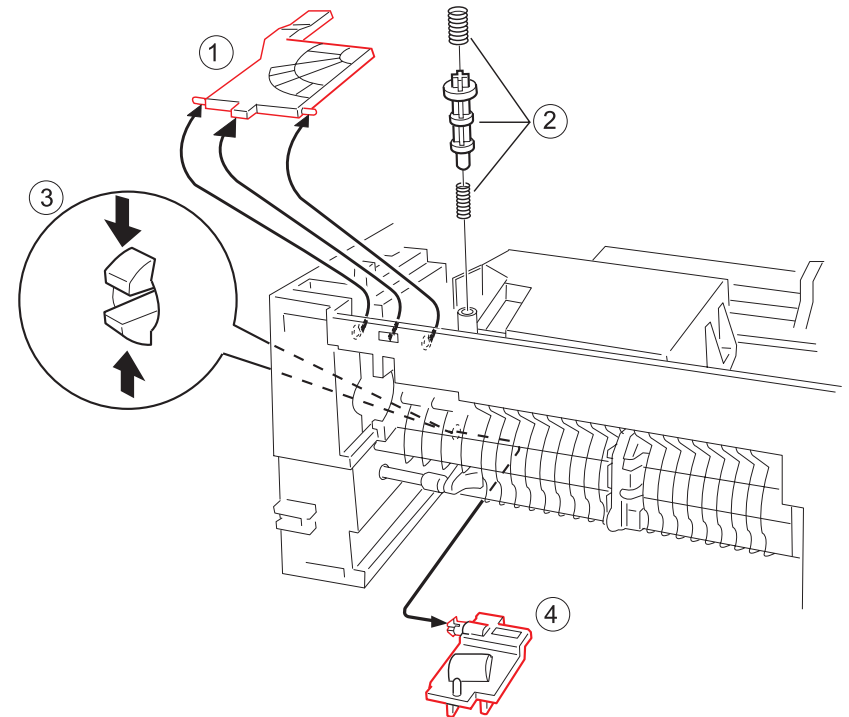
“Roll Assembly Pinch Pre-Registration” Removal
